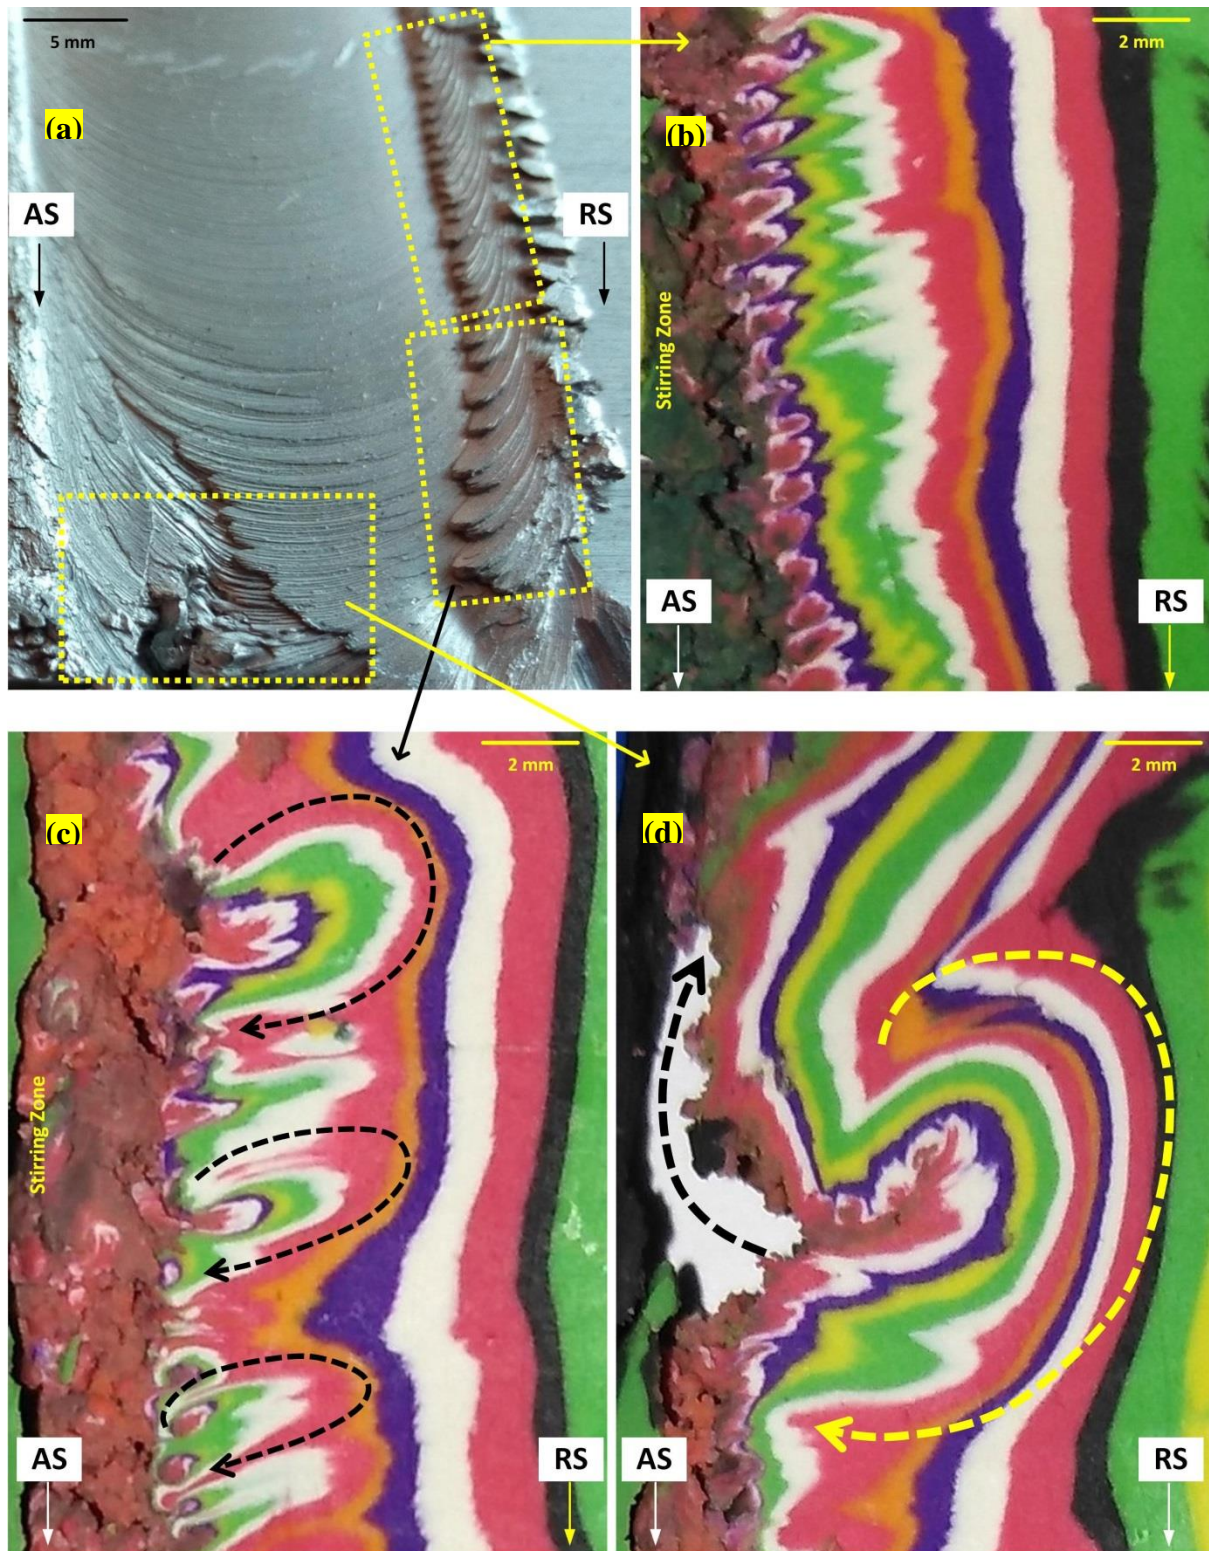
Surface flow patterns of the BFSW weld samples on plasticine (50 rpm, 50 mm/min) and aluminium 6082-T6 (650 rpm, 400 mm/min), in both cases Figure 5.6 shows the top-view.
